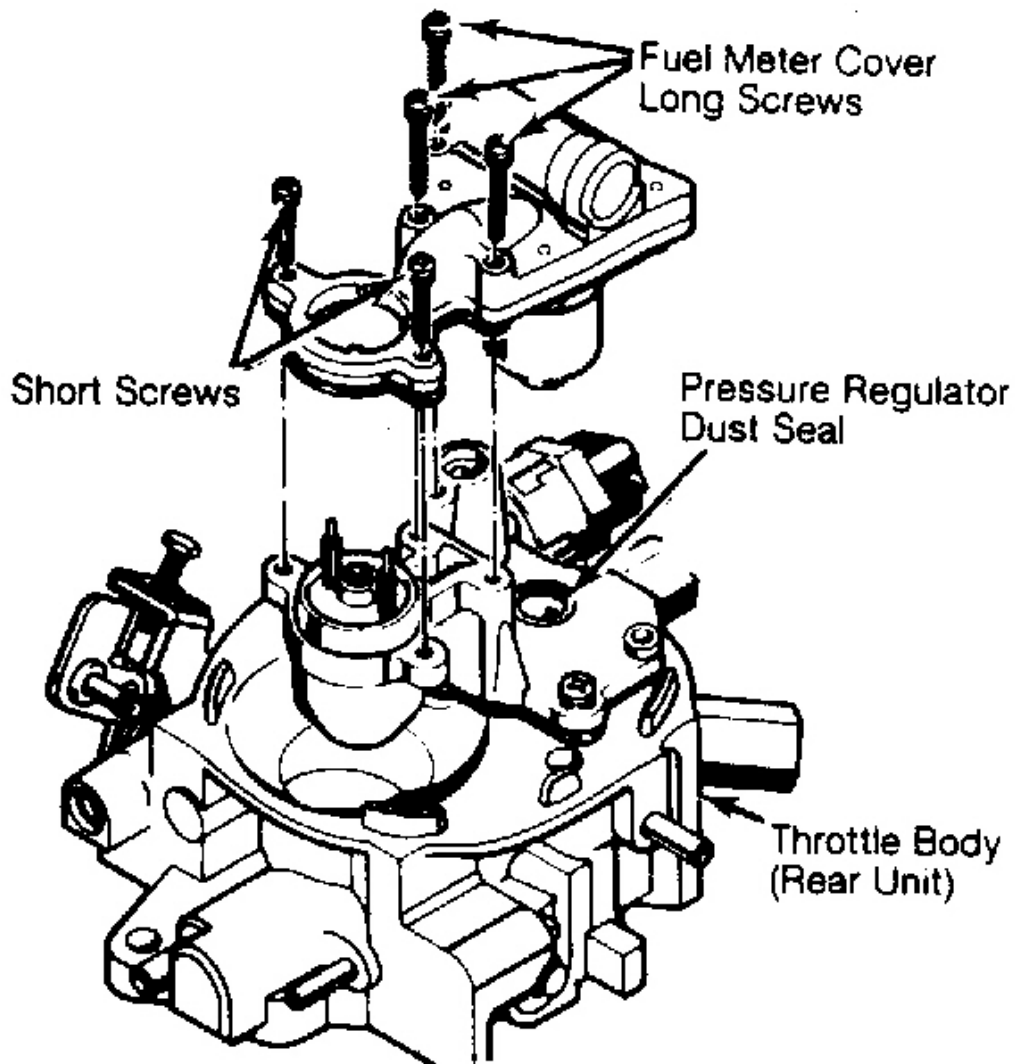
Removing Fuel Meter Cover Assembly Do not remove fuel meter cover gasket at this time.
